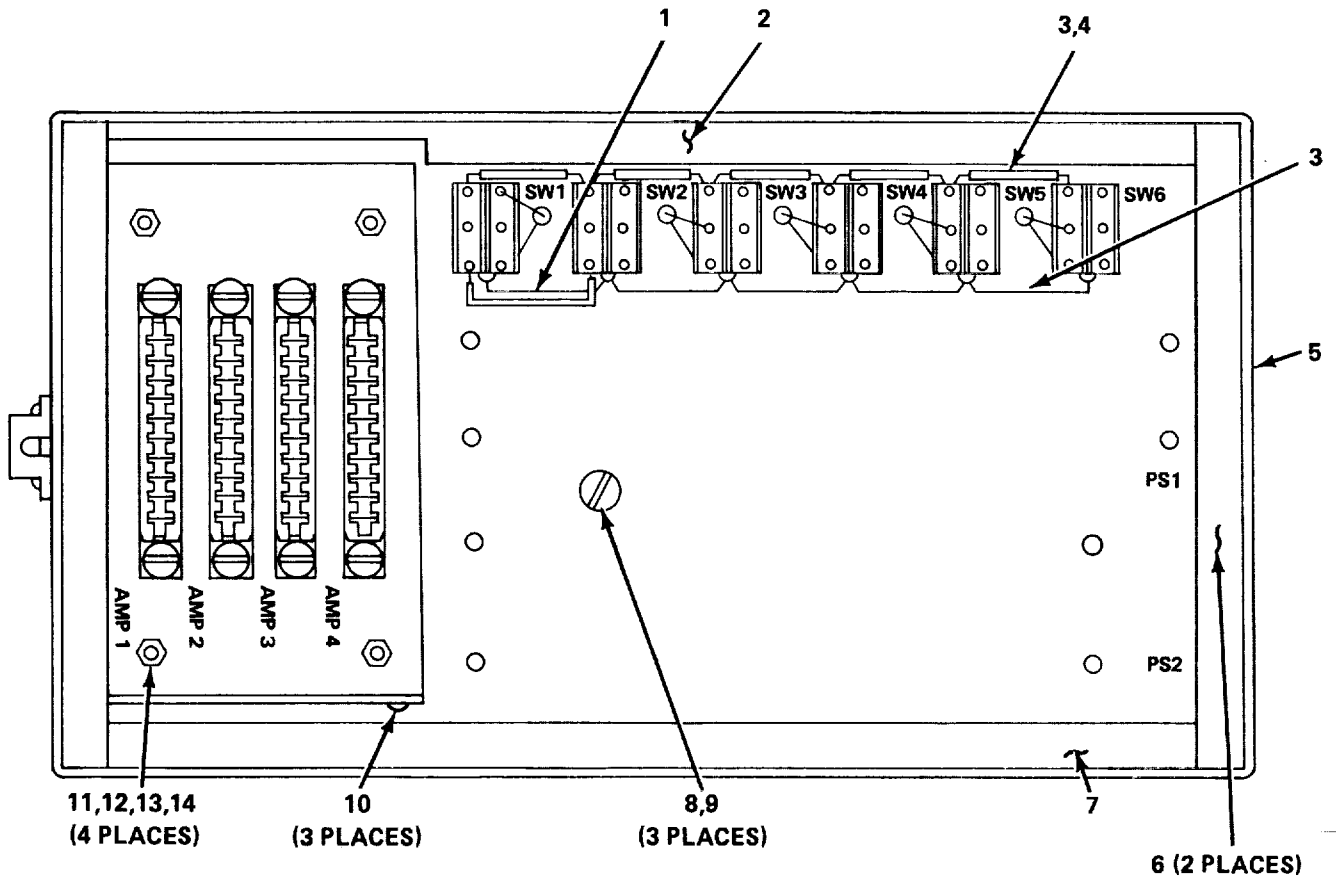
Cover, Switch, and Terminal Board Subassembly
